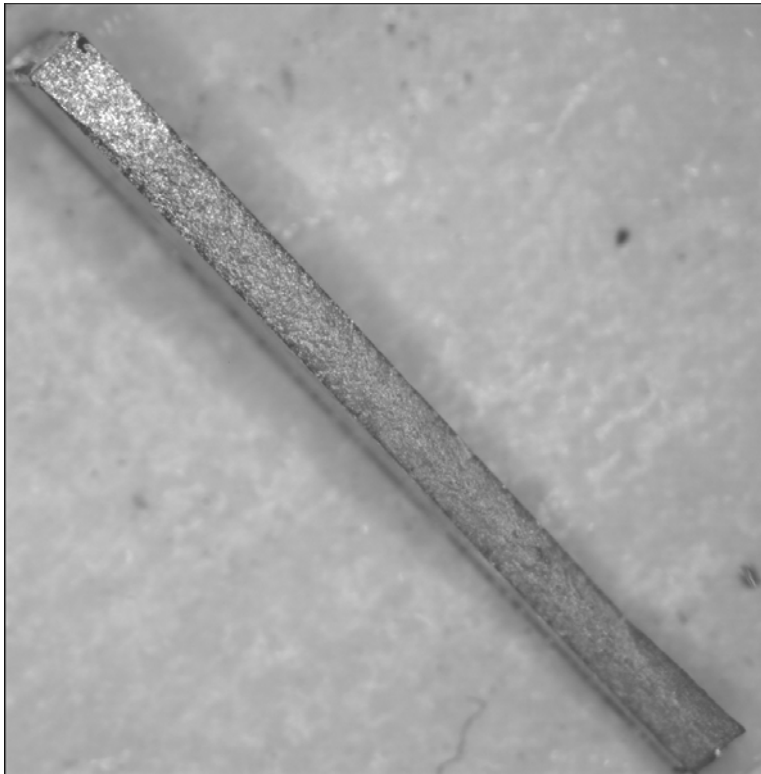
Fracture Surface of Specimen 5944.
